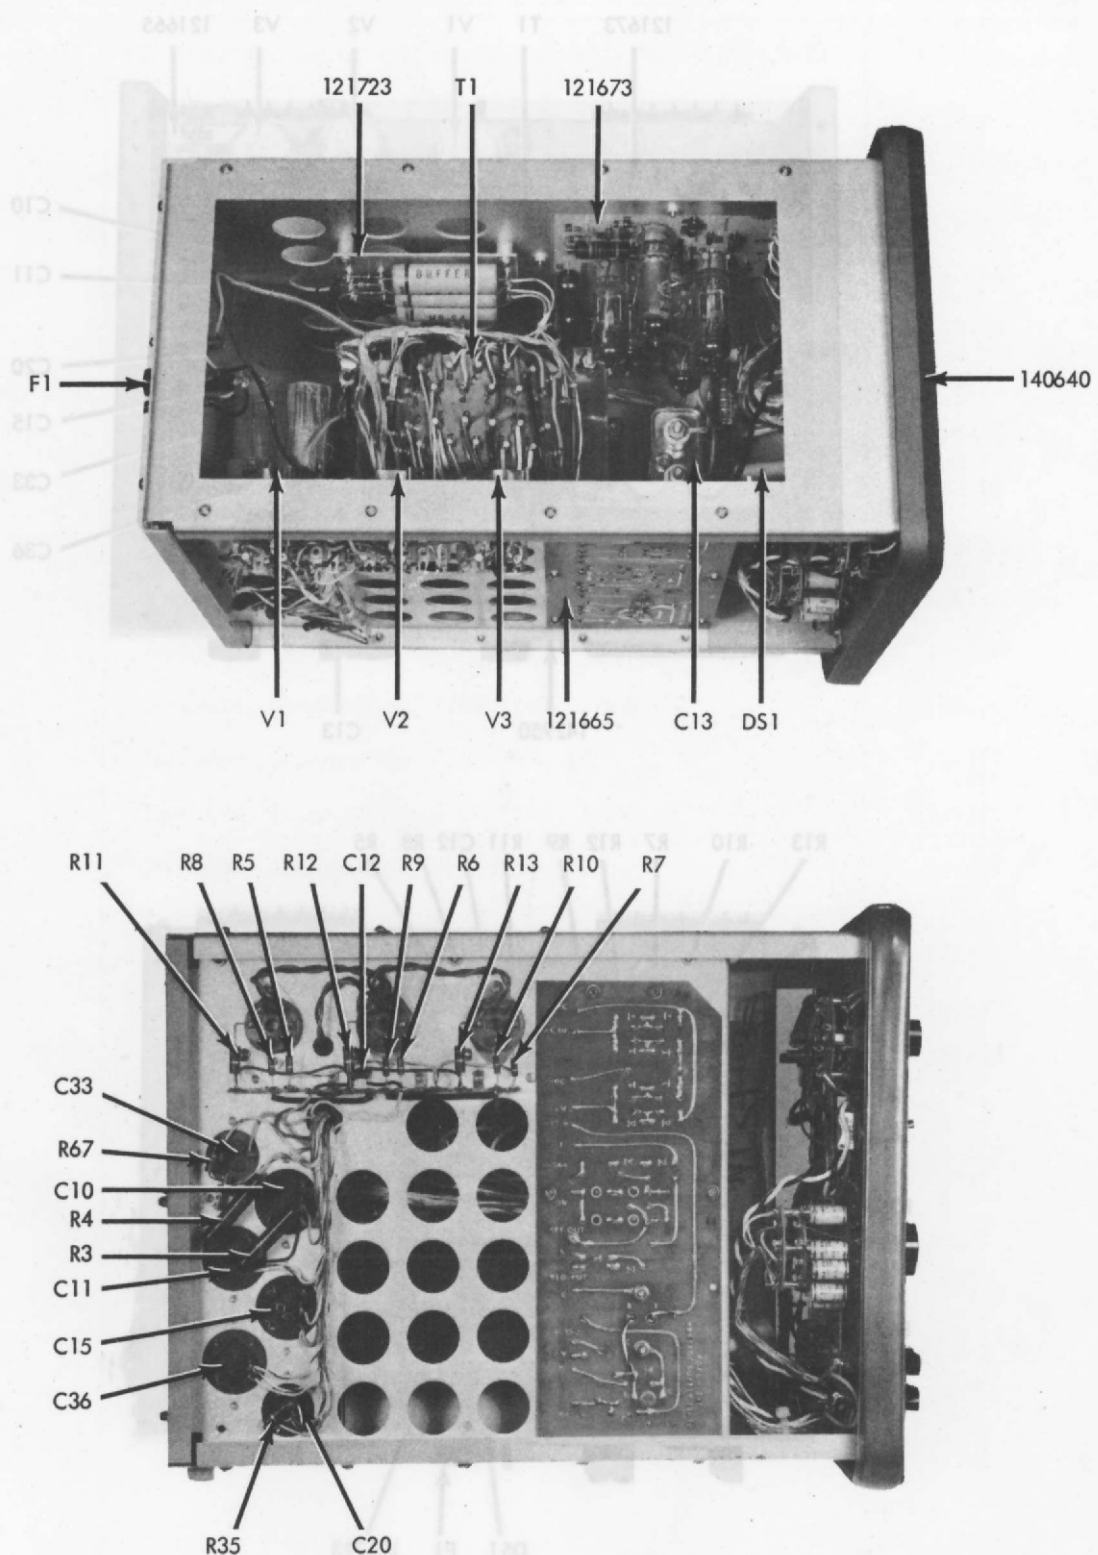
FINAL ASSEMBLY (Cabinet Model)
